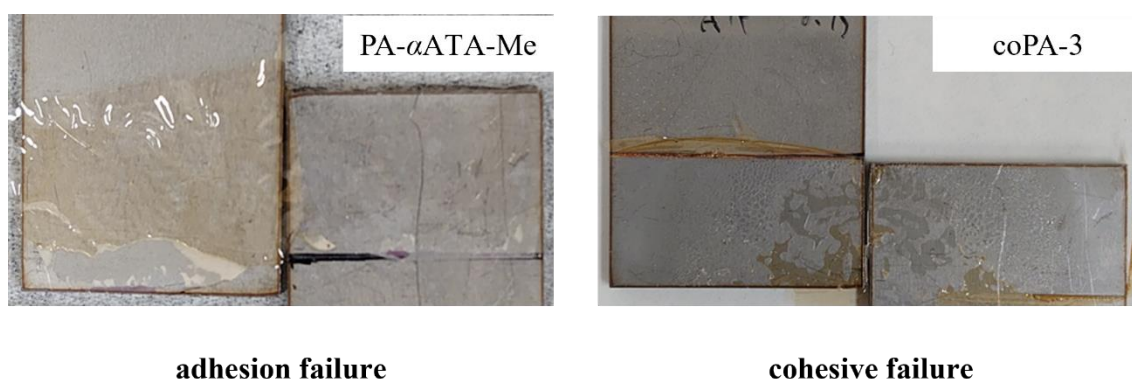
Appearance of fractured surfaces after tensile test glued by PA- α ATA-Me and coPA-3.
